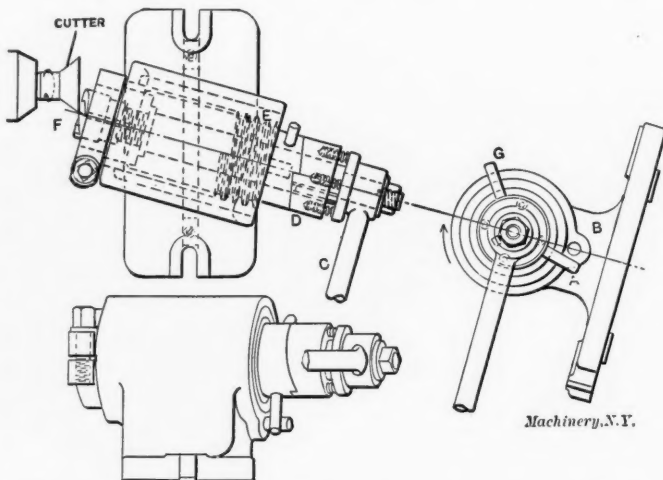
Plan and Elevations of the Clutch Milling Fixture shown in Fig. 17
